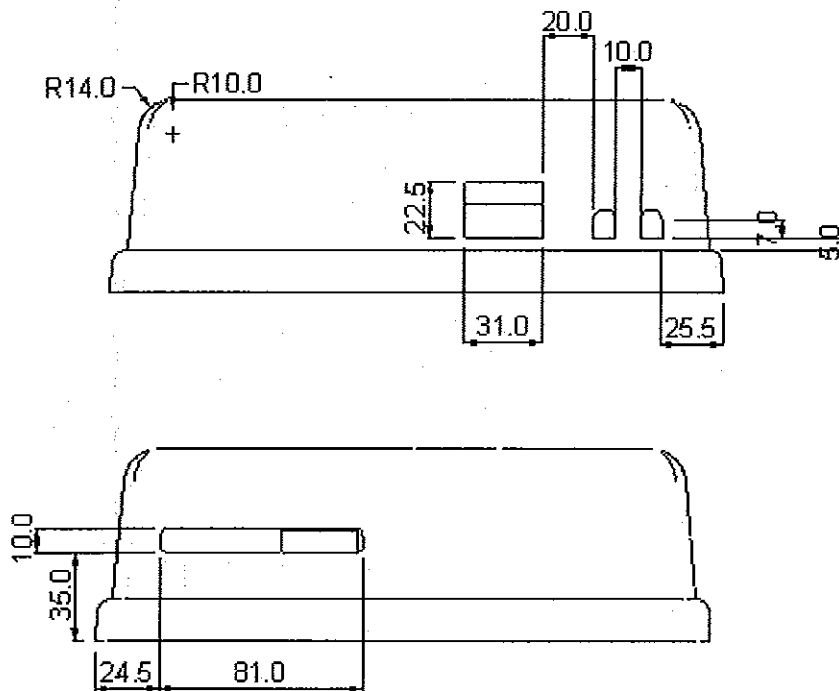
Figure J: Front view of the Vacuum Formed housing showing dimensions in mm.
